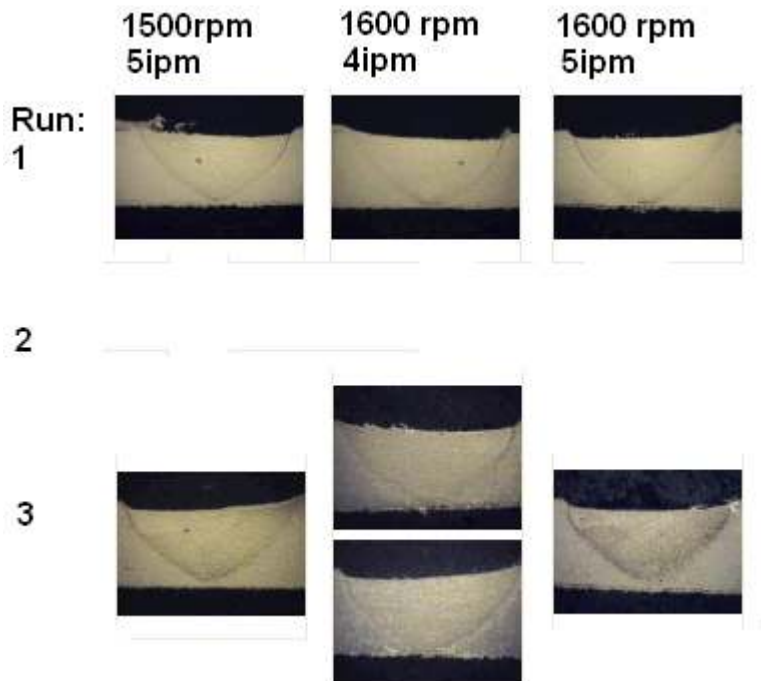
90° conical tool macrosections. Note: Run 3, 1600rpm, 4ipm, 90° was macrosectioned twice.
